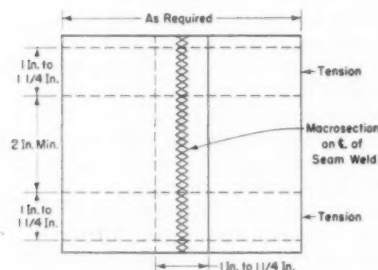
Seam-weld specimen for tension and macrosection
